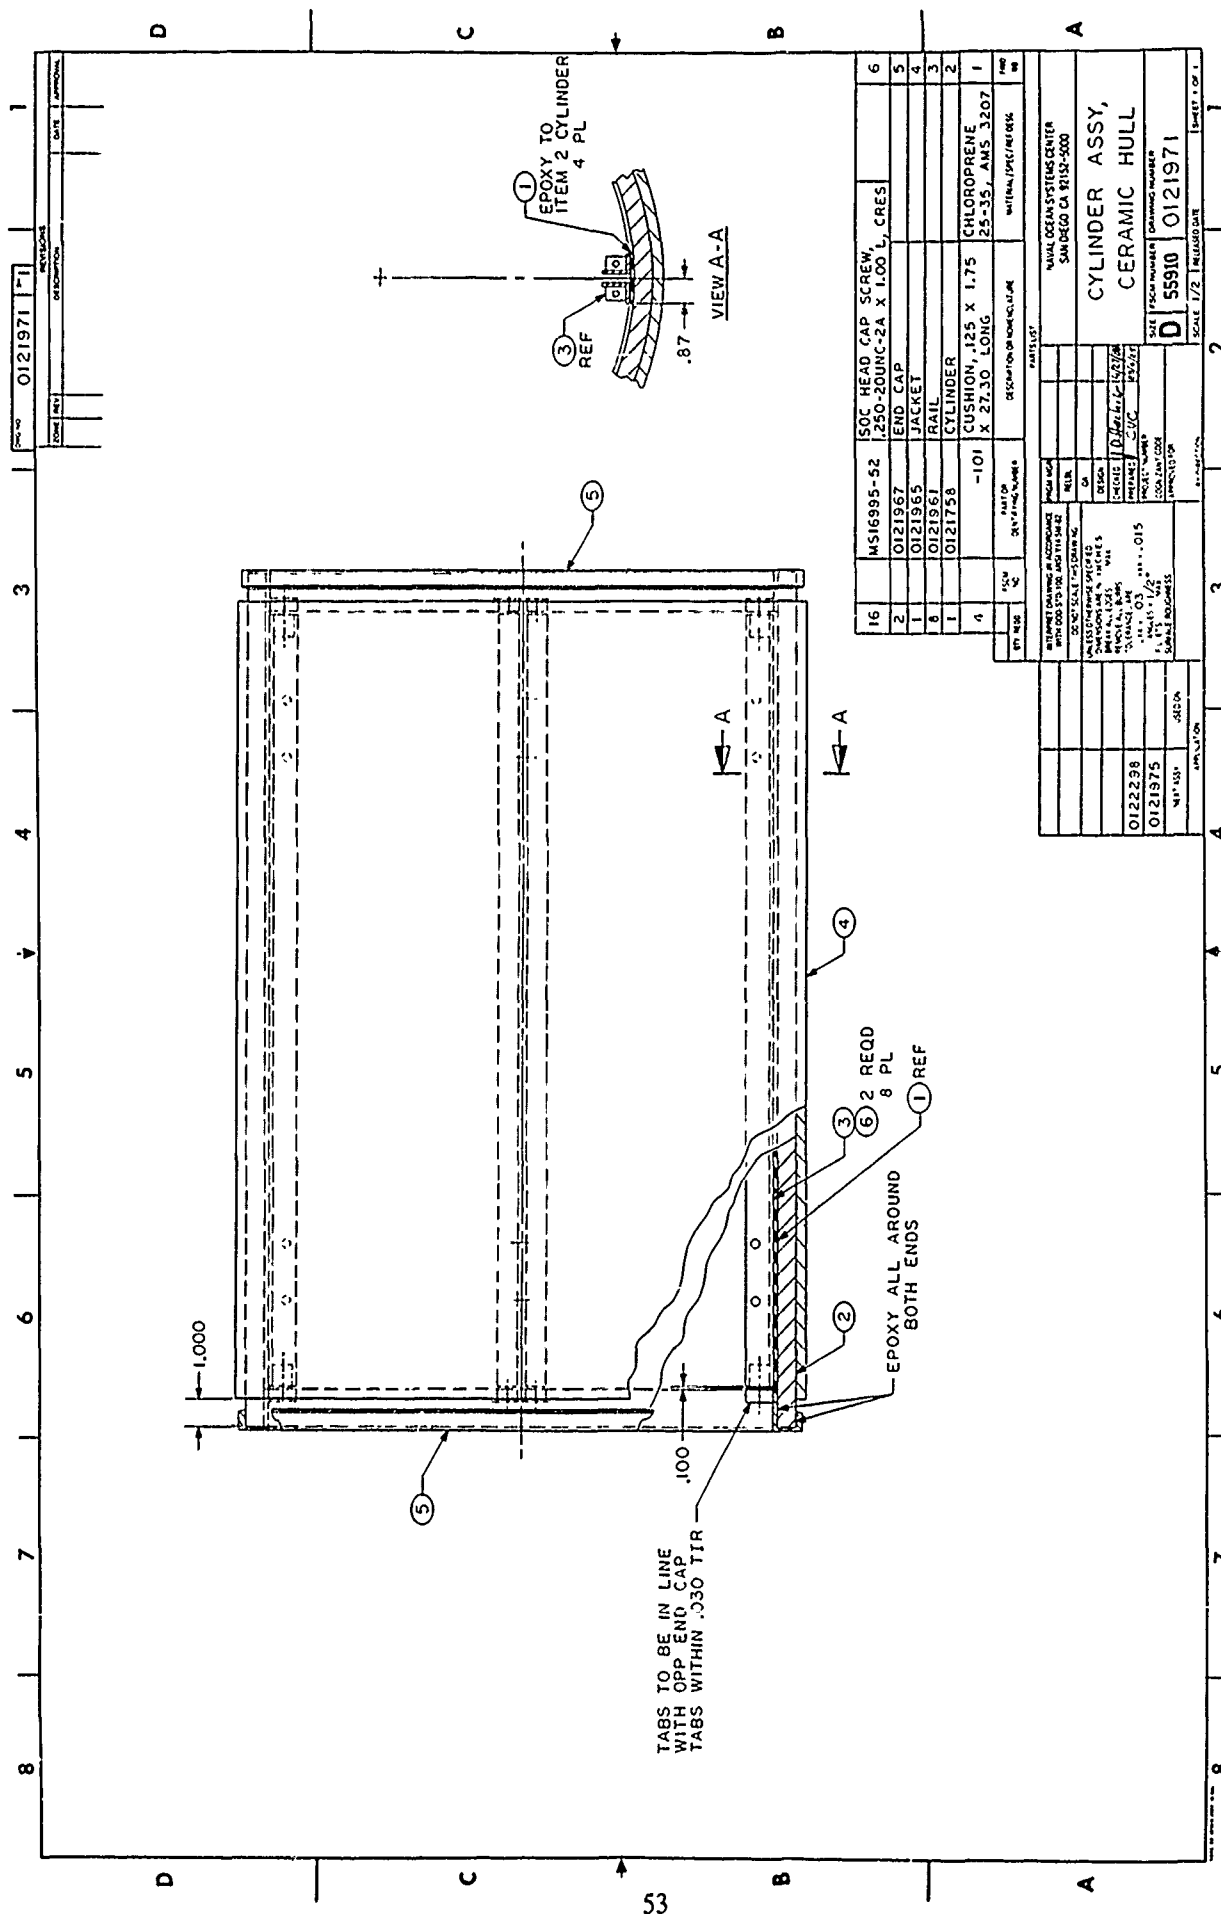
Assembly drawing for the 20-inch-diameter cylindrical section.
